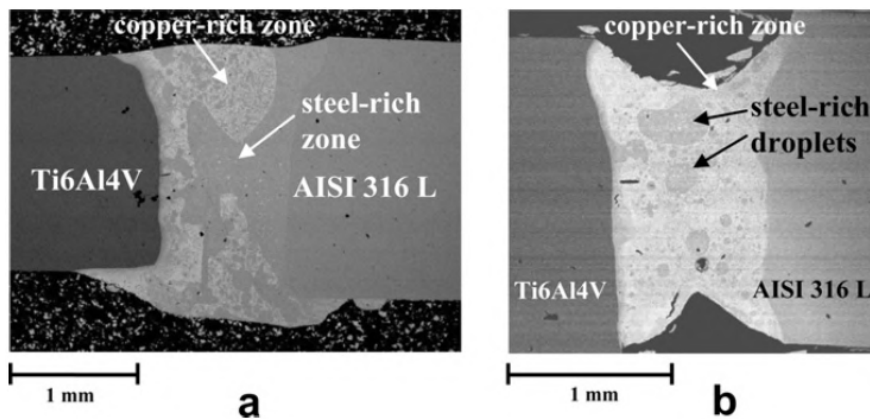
Weld bead morphology, electron beam a) and pulsed laser b)
